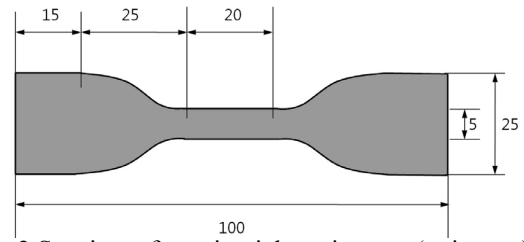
Specimen for uni-axial tension test (unit: mm)
